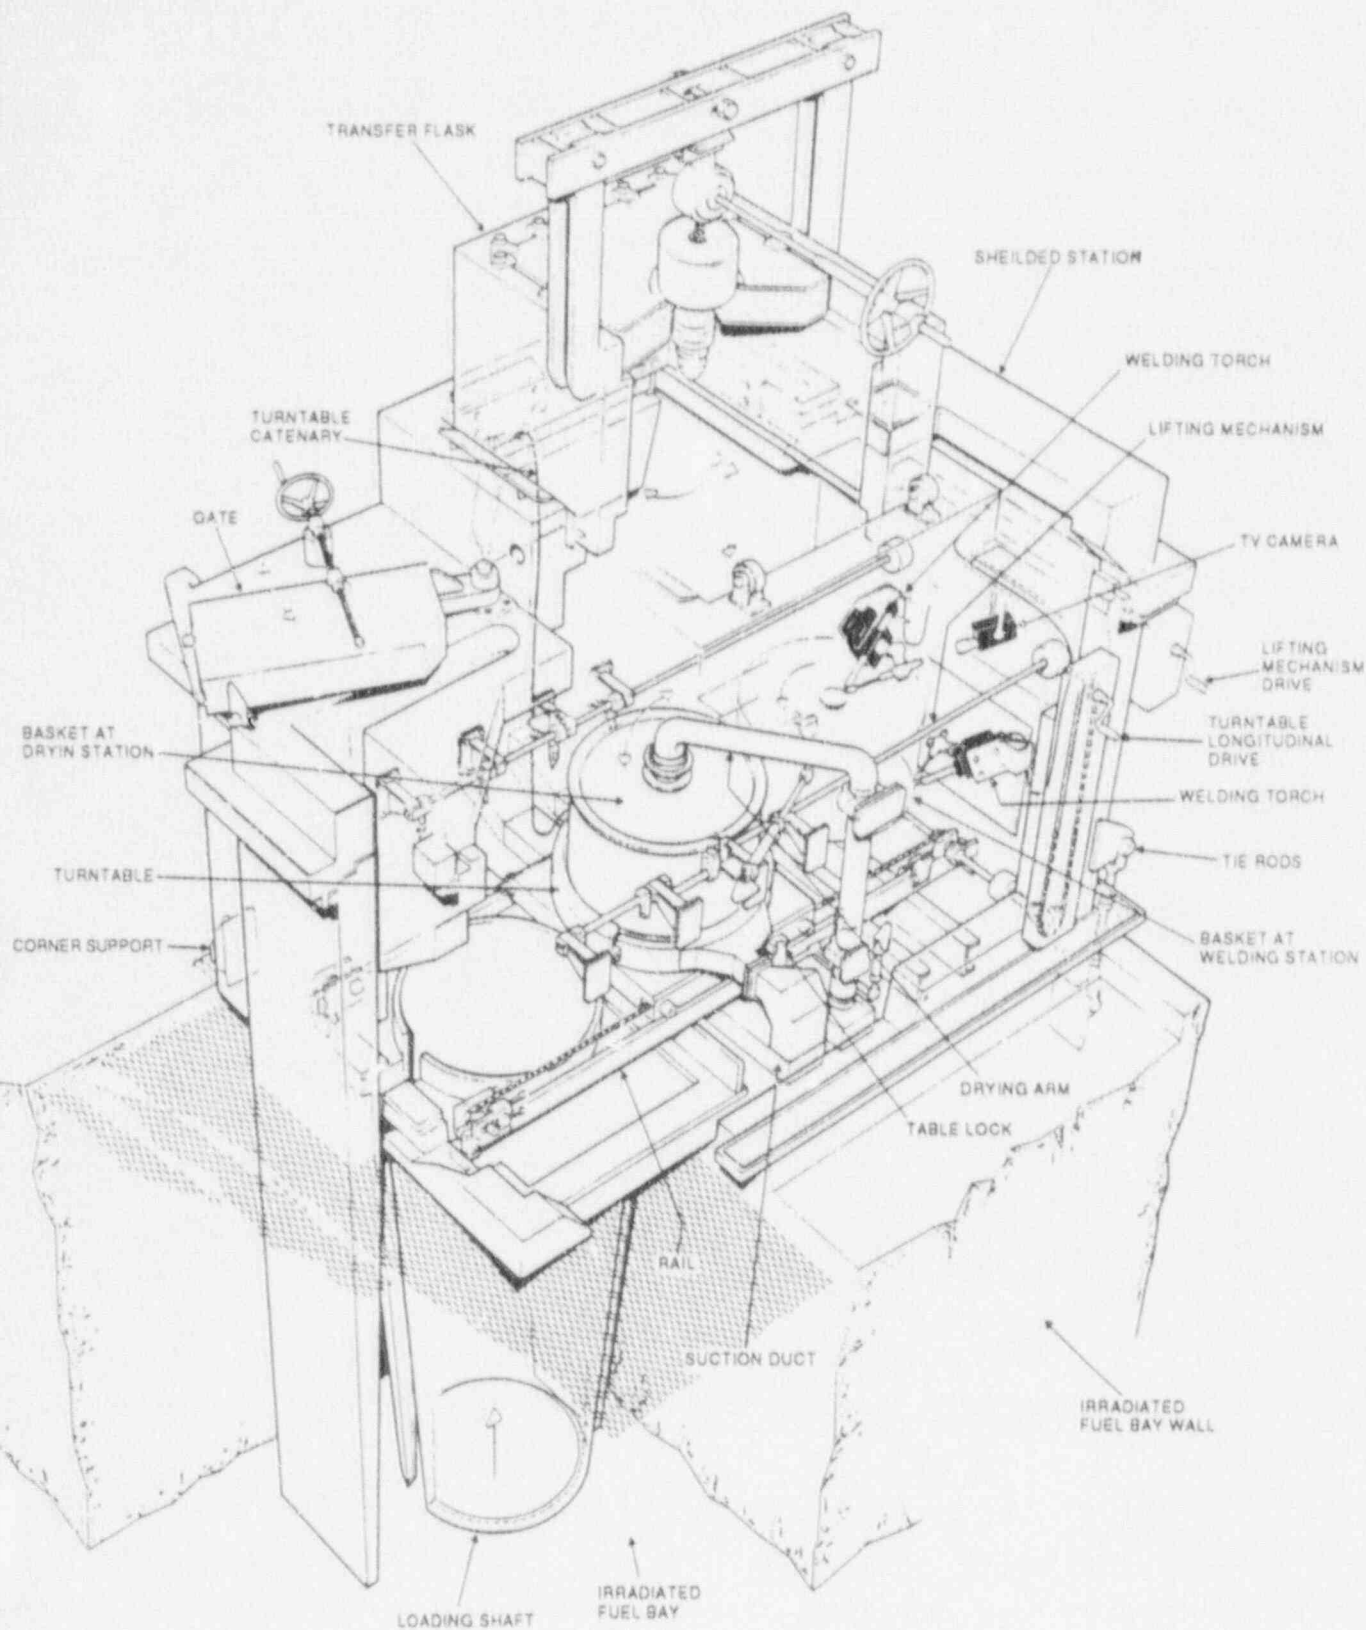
SHEILDED WORK STATION INSTALLATION
